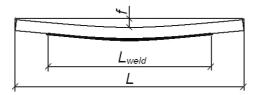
Scheme of overlaying welding of idle rolls in process of alignment of element by welding
